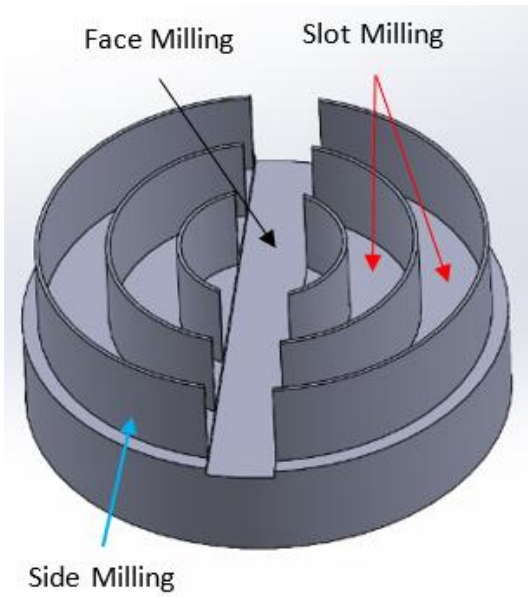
Workpiece to be machined in Aluminum AW6026-LF-T6
